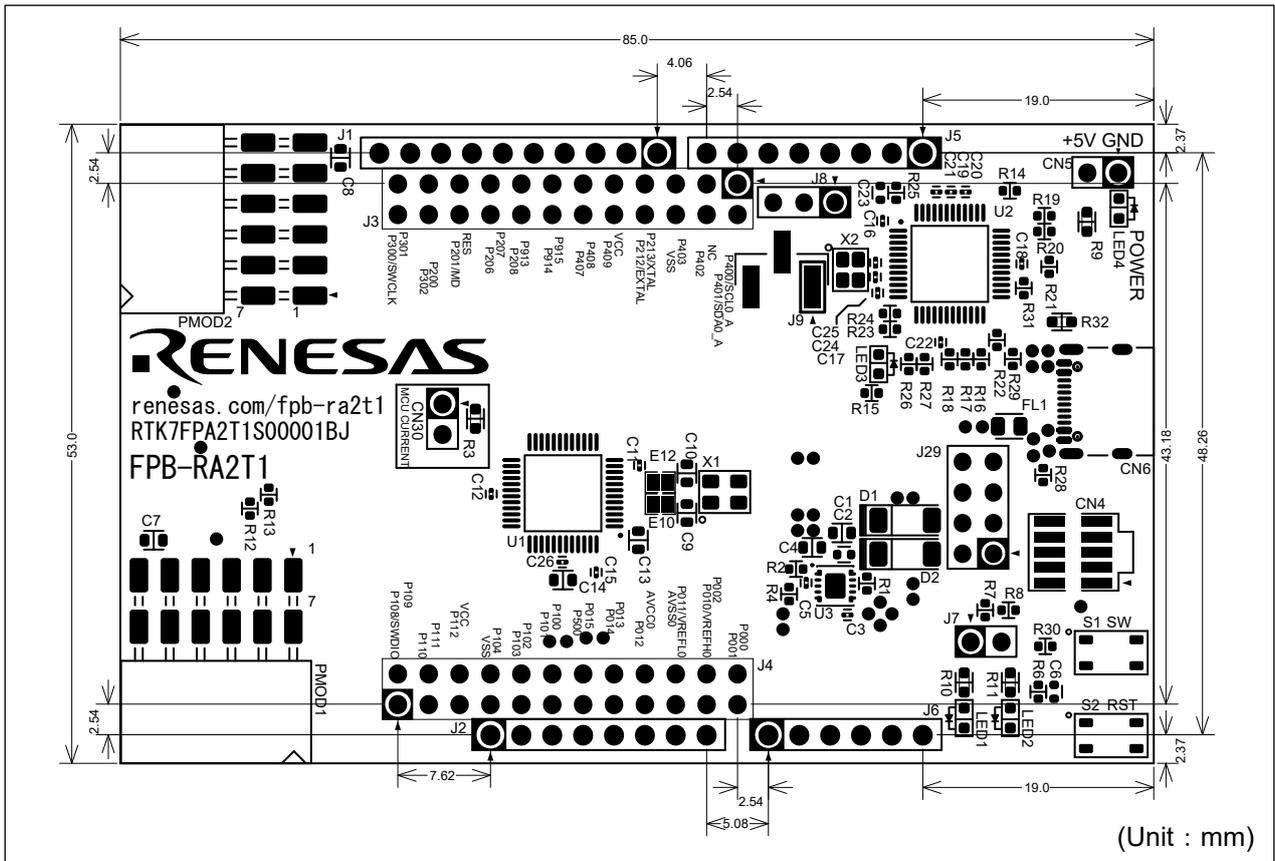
Layout Diagram of Components on the FPB-RA2T1 Board (Top View)
